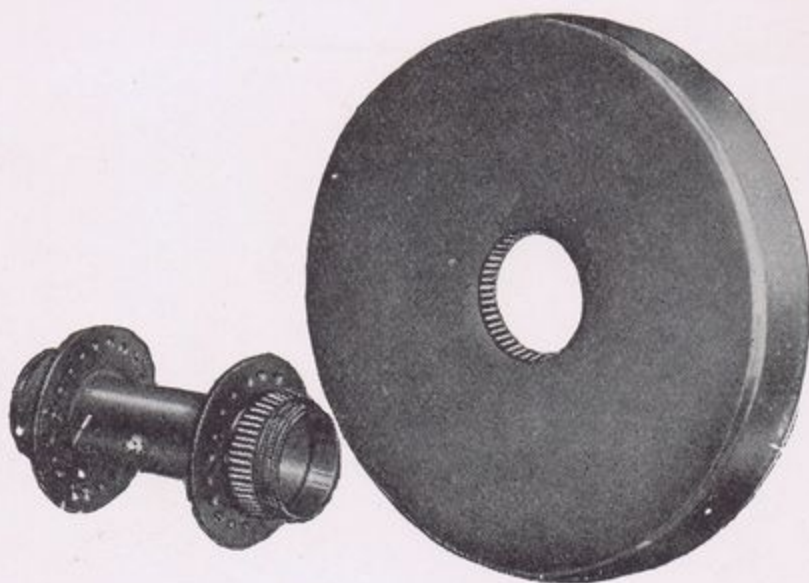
HUB AND BRAKE DRUM USED ON ALL MODELS
